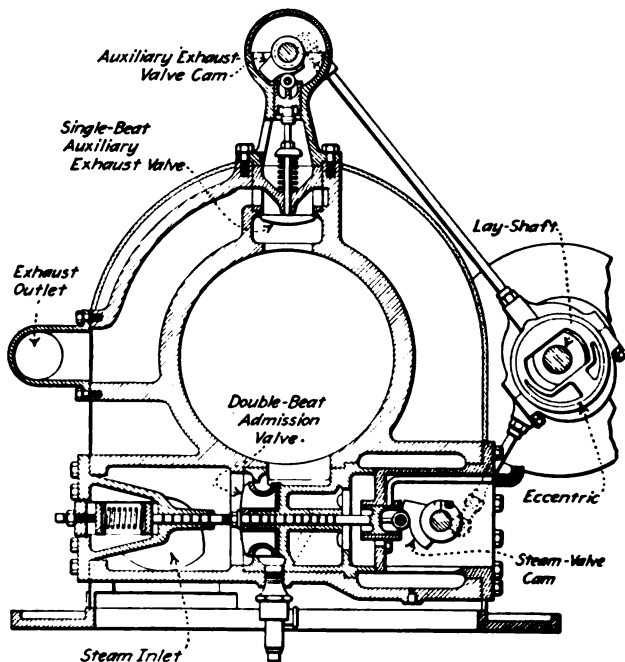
Section of poppet-valve engine cylinder of Hamilton uniflow engine. (Hoover Owens, Rentschler Co.)
